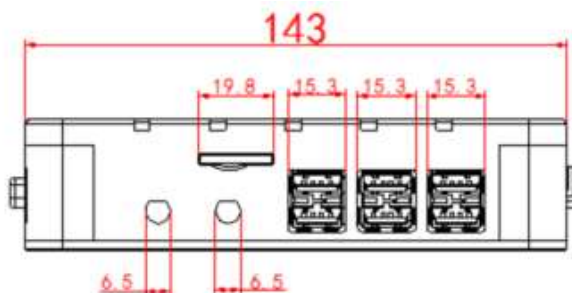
NIS-B987 Front cover mechanical dimension drawing
